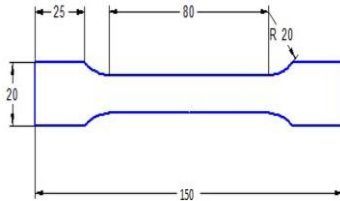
Shows Dimensions of Tensile test specimen (All dimensions are in mm)
